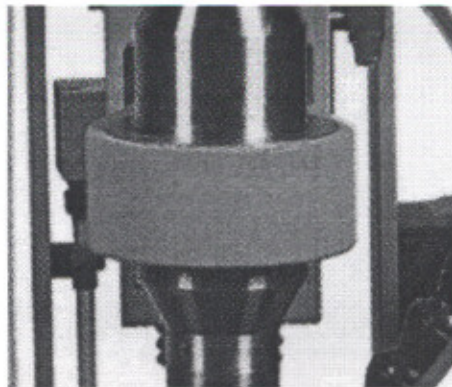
Amplitude coupling for compact 500W USM machine [57]
